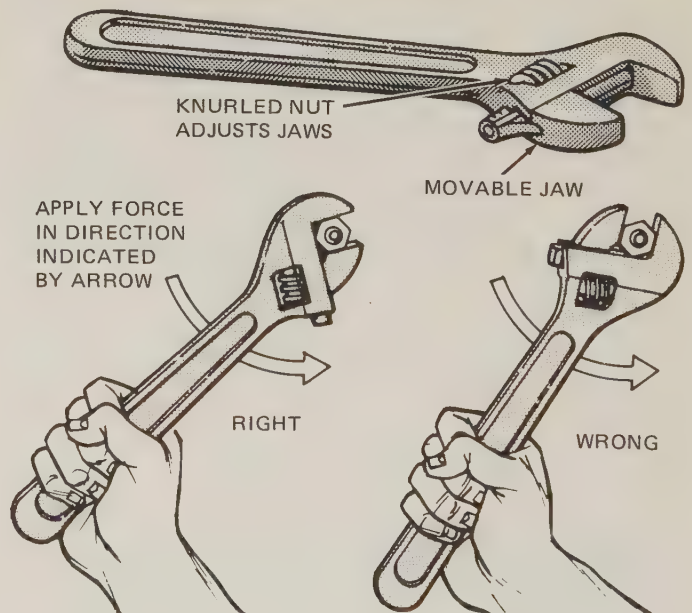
When using an adjustable wrench, pull on the handle so the major load is carried by the stationary jaw, as shown in the lower left illustration. (Ford Motor Company)
